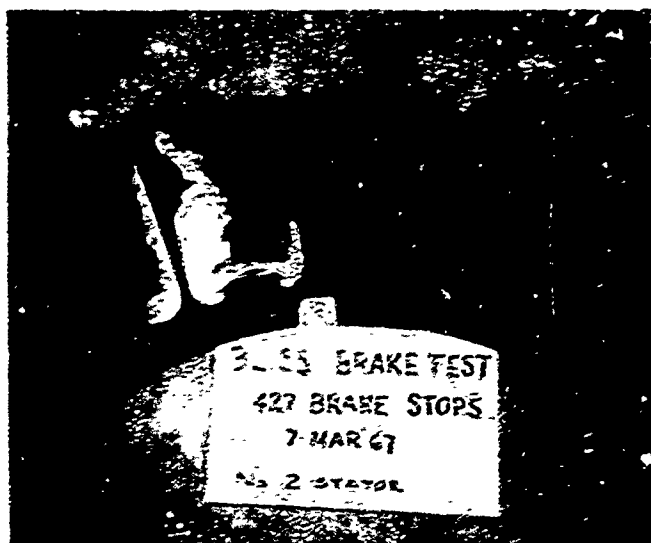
Bliss Rotor 2 Showing Cracks in Wear Pad After 427 Arrestments
